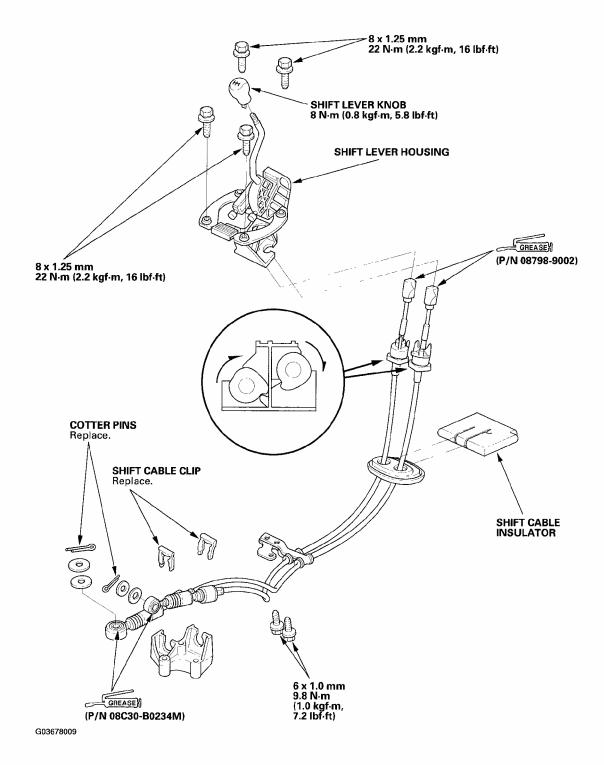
Replacing Gearshift Mechanism And Torque Specifications Courtesy of AMERICAN HONDA MOTOR CO., INC.
